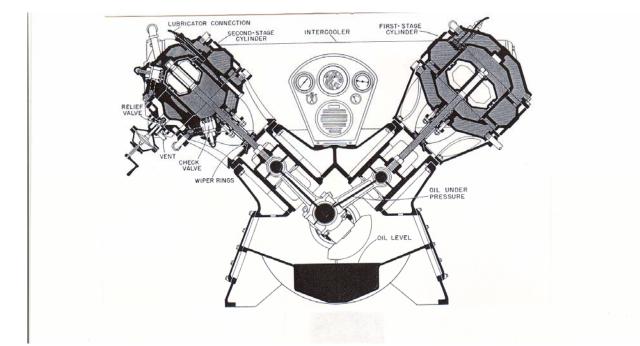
V-type, Two Stage, Double Acting Reciprocating Compressor
